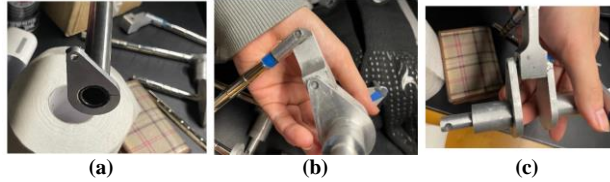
Crankshaft parts. (a) crank throw, and (b)&(c) piston & connecting rod & crank throw.
